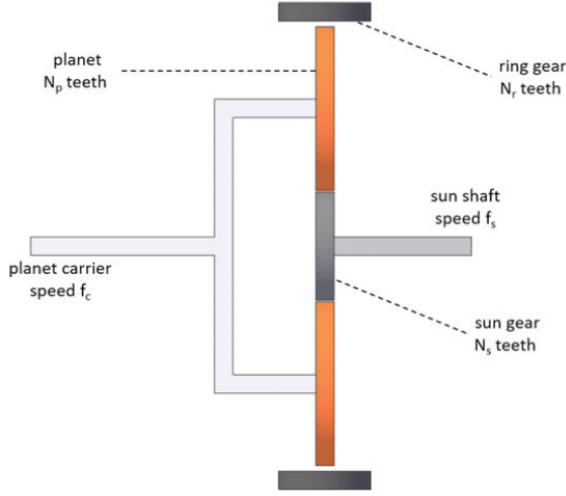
Illustration of planetary gear (Barszcz, 2019).
